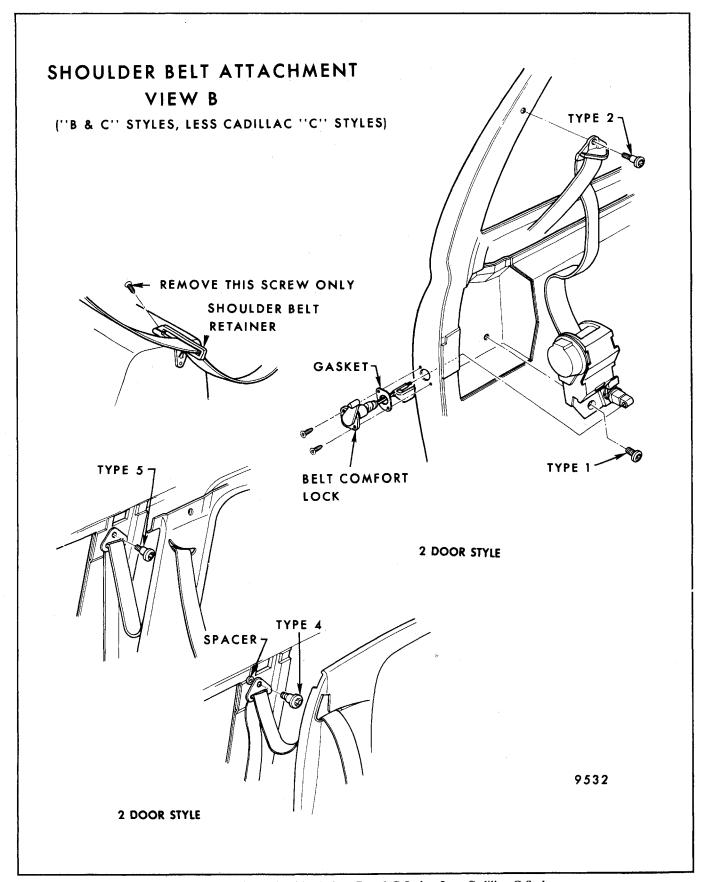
Front Seat Shoulder Belts - B and C Styles, Less Cadillac C Styles s
